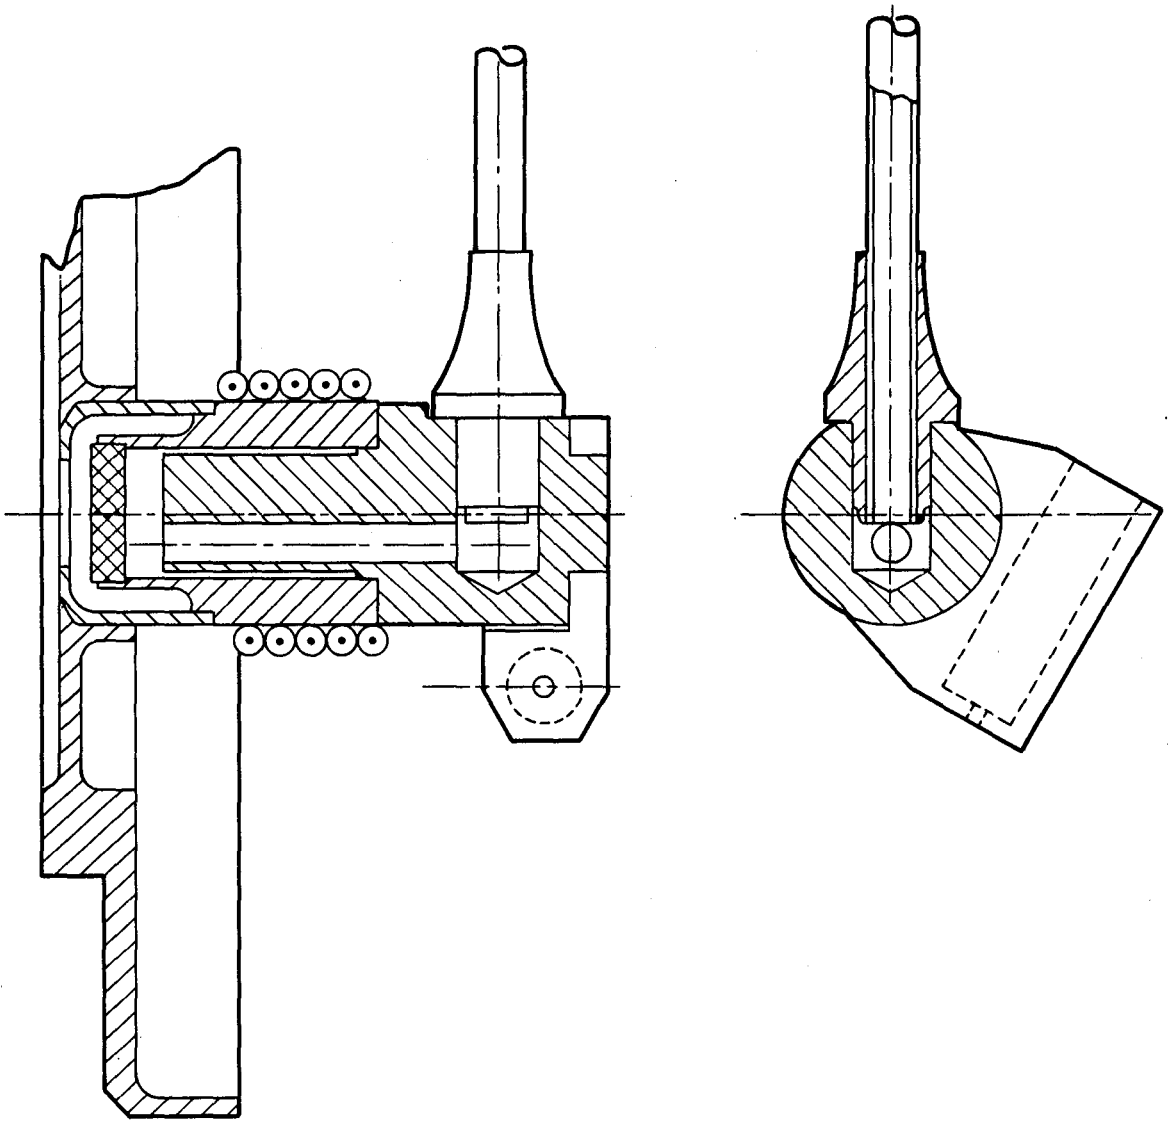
Cathode vaporizer assembly - J-series thruster design.
